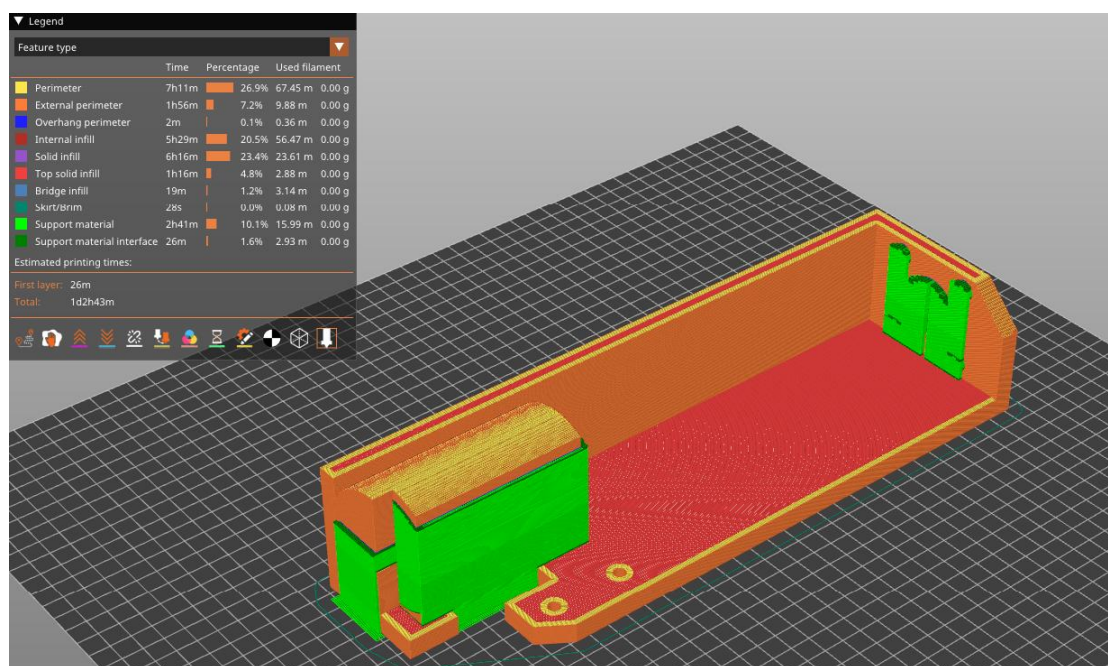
Prusa Slicer Analysis of the Designed Mounting Component
